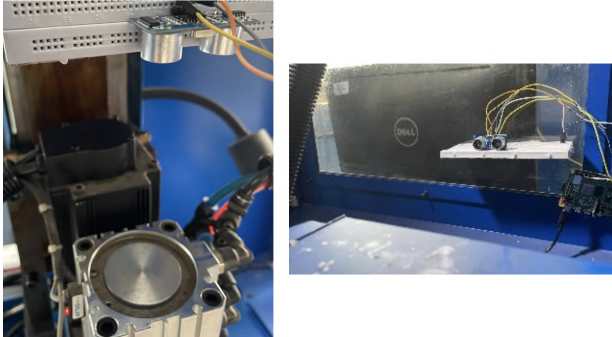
Mounting of Ultrasonic Sensor for detecting the tool position along X,Y and Z directions
